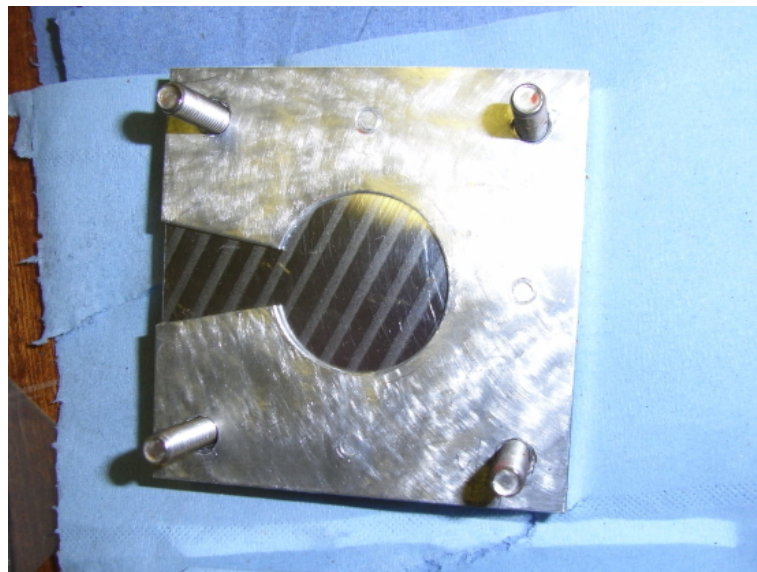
An open radial pad mould. A plate is placed on top which forces excess glue out of the spout. Tapped holes in the top plate allow ease of removal.
